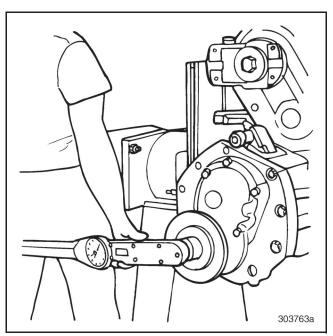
Tightening Output Yoke Clamp Plate Capscrew
